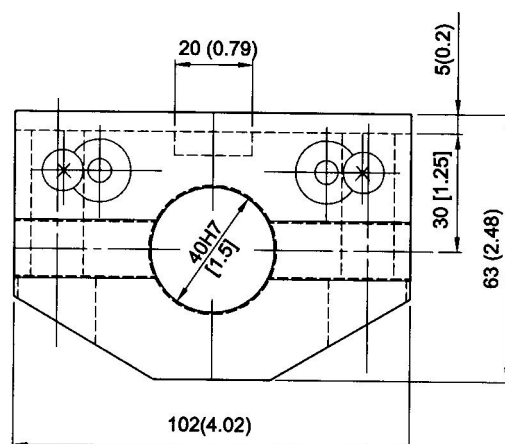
Toolholder Dimensions (ID Toolholder Base)
